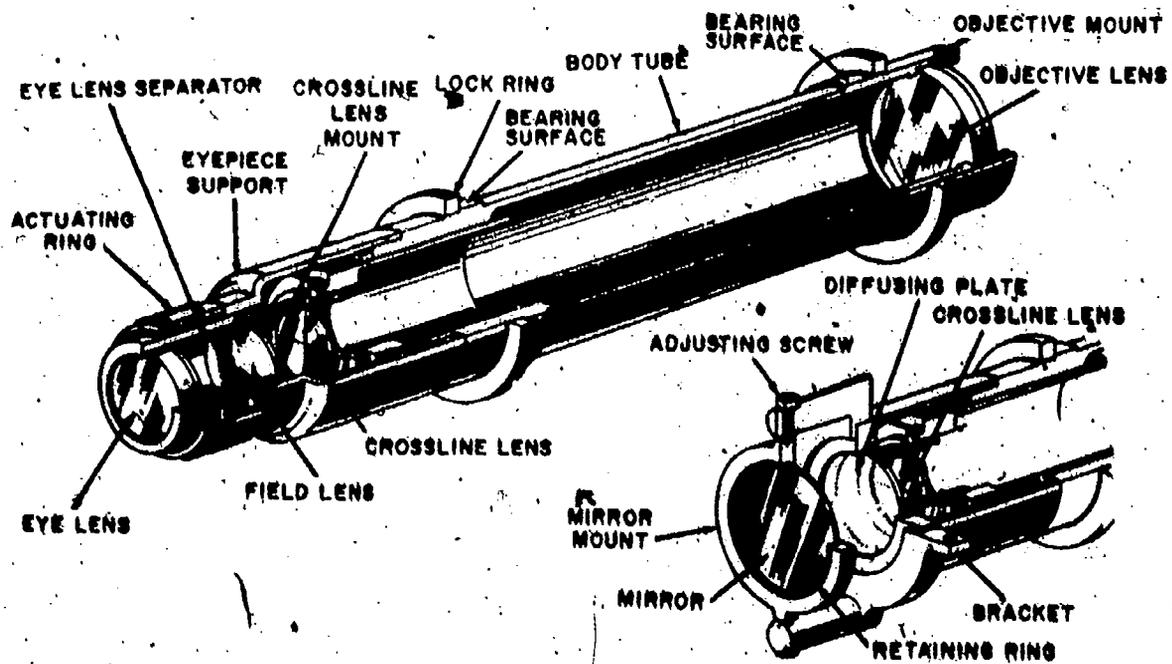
Collimator telescope Mk 8 Mod 1 with auxiliary eyepiece, mirror mount, and diffusing plate—cutaway.
